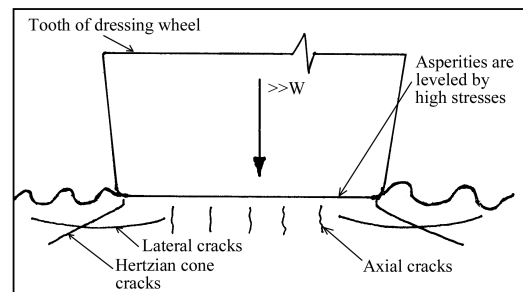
Wear mechanism beneath a tooth - severe loading case
